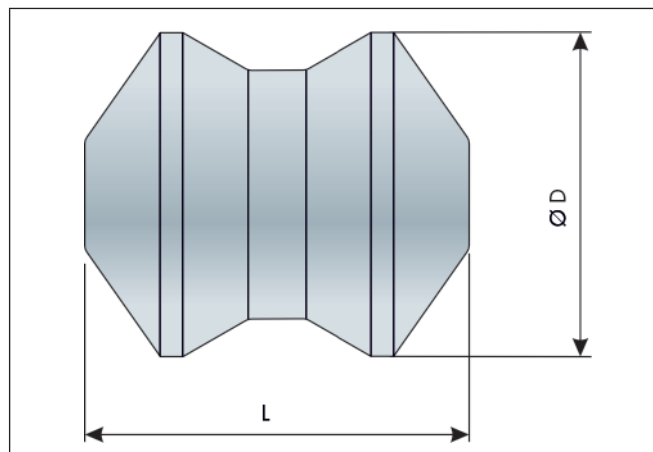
Dimensional drawing of the TWIN 1 and TWIN 2 pigs
